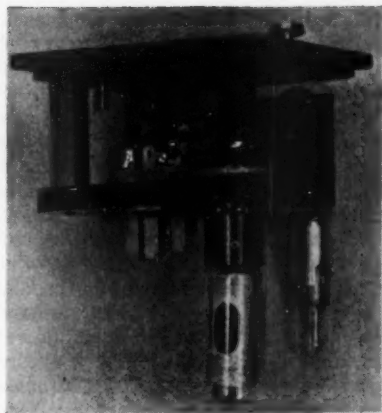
"Plug-in" assembly of photocell and pipper lamp. Note coin-slotted captive screws which anchor assembly in place on camera.
